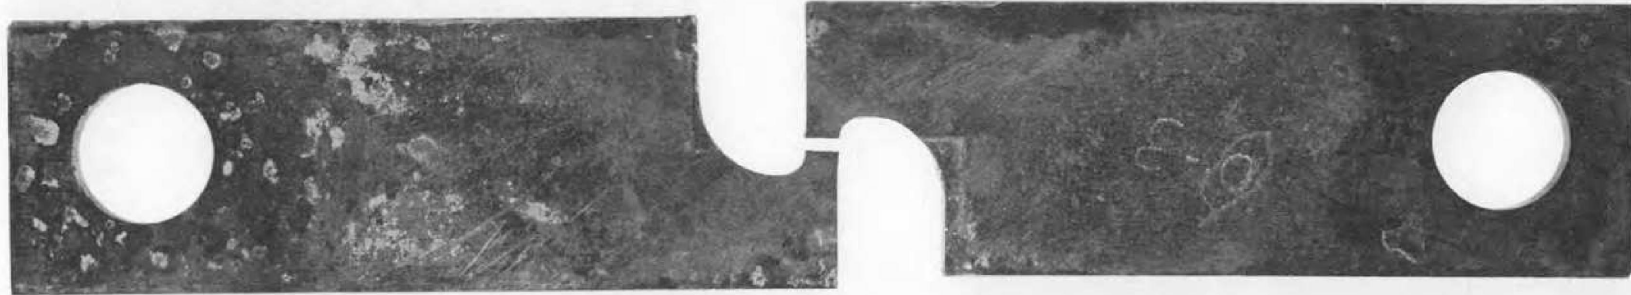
Miller-Peaslee-Type Shear-Test Specimen.
